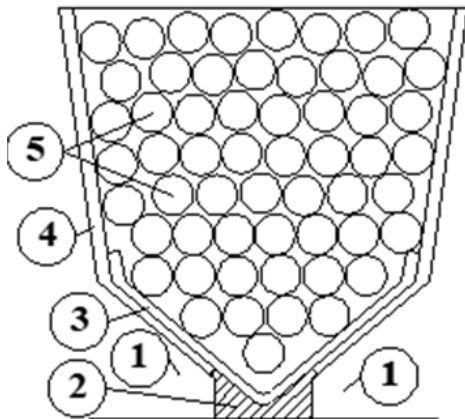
Stator slot of a low-voltage motor casted with ferro-resin with inserts. Key: 1 - tooth, 2 - ferro-resin, 3 - insert, 4 - slot insulation, 5 - winding wires
